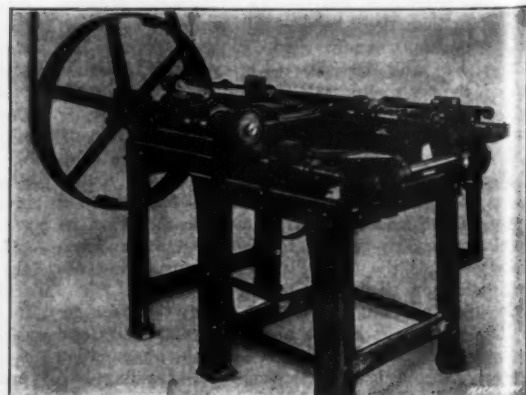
A machine which makes hinges for pianos faster than one could count them.
